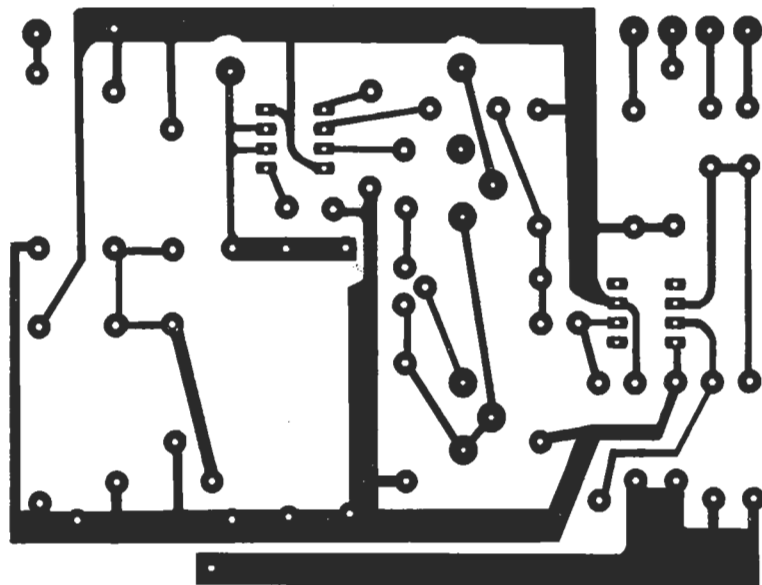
Though the prototype of the tachometer was assembled on perforated board, it is convenient to use a printed circuit board. C7A is two 0.033 capacitors if this is preferred to one 0.068. (See Parts List to order board.)
